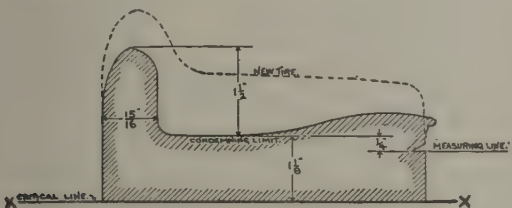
STEEL TIRE, SHRINKAGE FASTENING ONLY.
